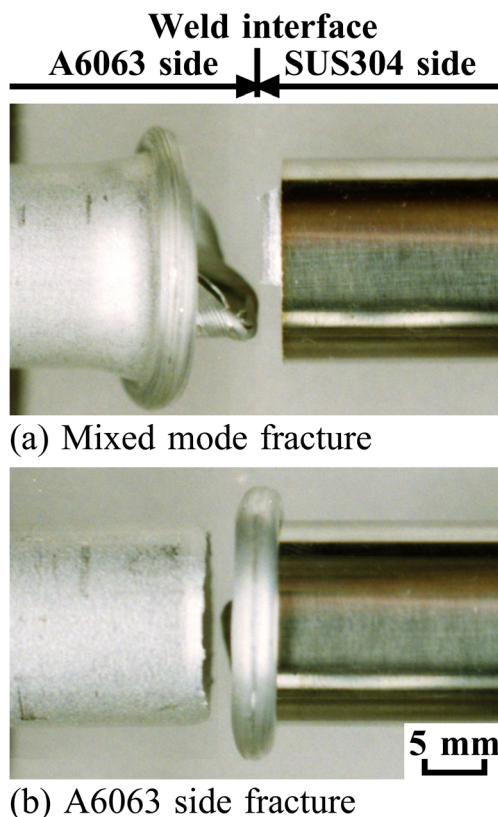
Examples of appearances of joint tensile-tested specimens with flash: a mixed mode fracture and b A6063 side fracture
